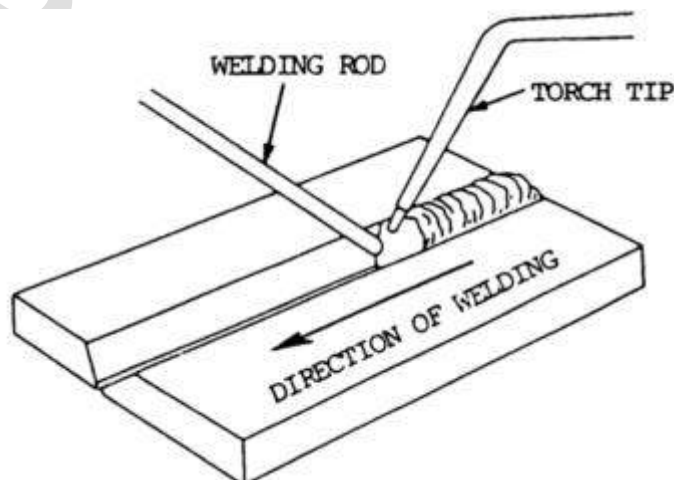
Backhand or leftward type oxyacetylene welding
